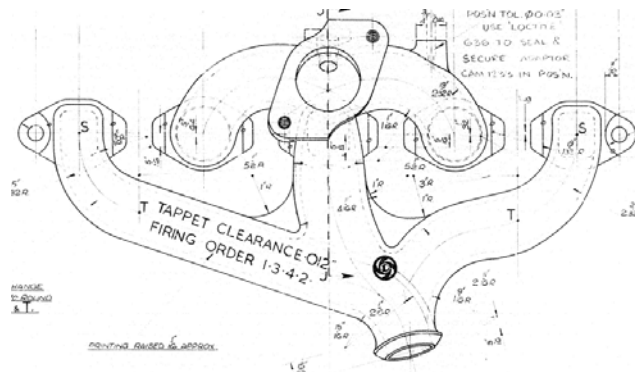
Inlet and exhaust manifold 998cc CAM4539
